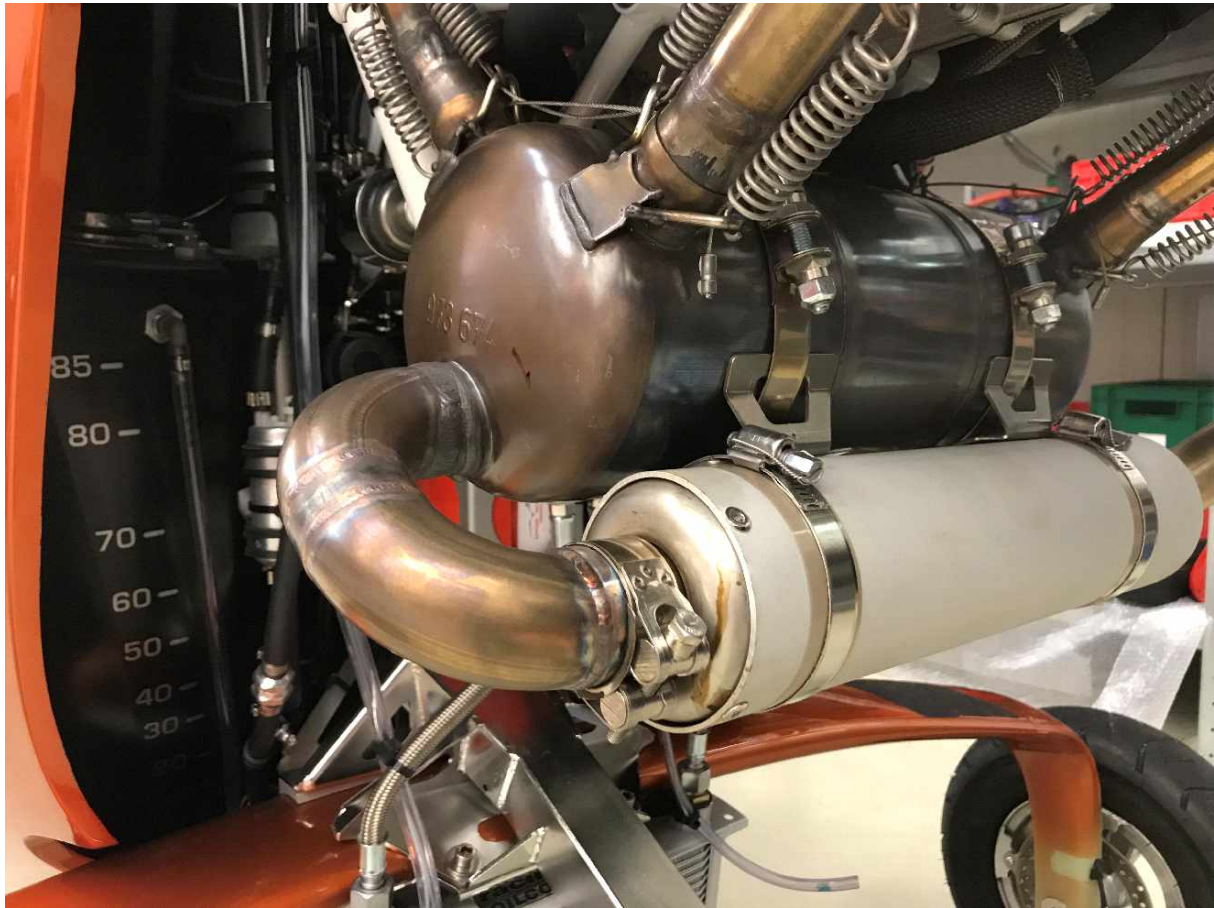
Installation of hose clamps and hinge pin clamp (912)
